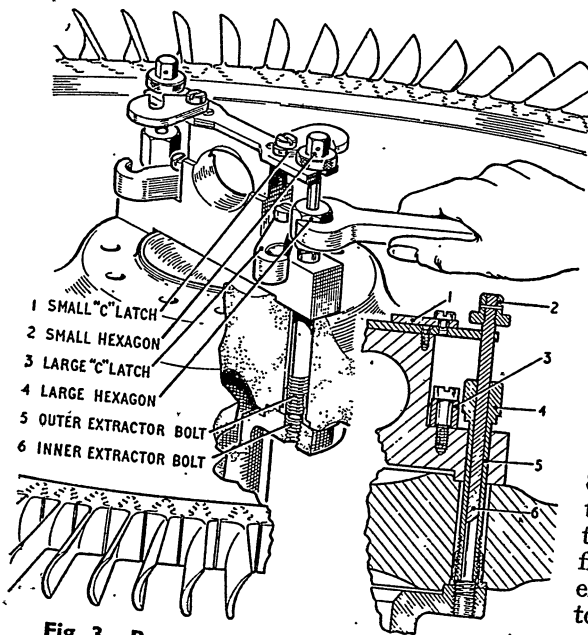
Removing the turbine disc with the combined extractor and lifting fixture T74332 and (inset) sectional view of extractor bolts
